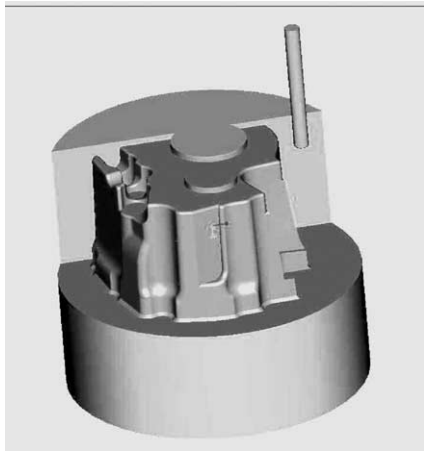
The cutting path in the machining of inlay of die casting die of housing cover.
